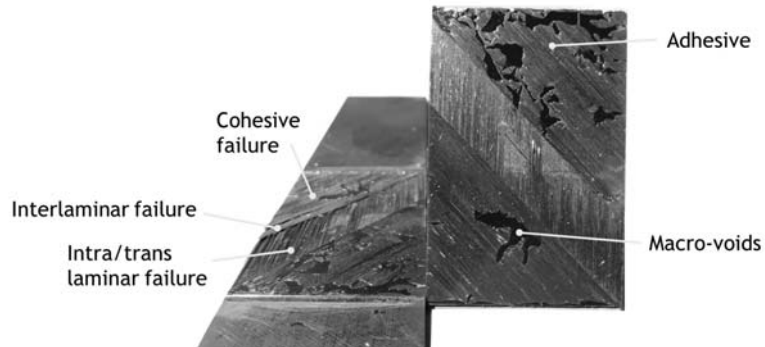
Typical fracture surface of the abraded specimens.
